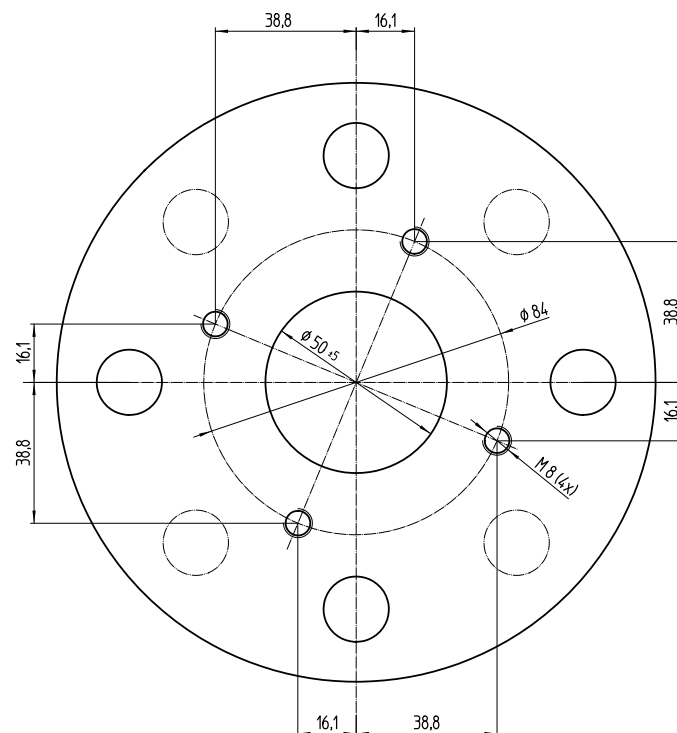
Adapter flange, clamping flange DIN32676 3"/DN65 (suitable for PS= 10 bar) in mm
